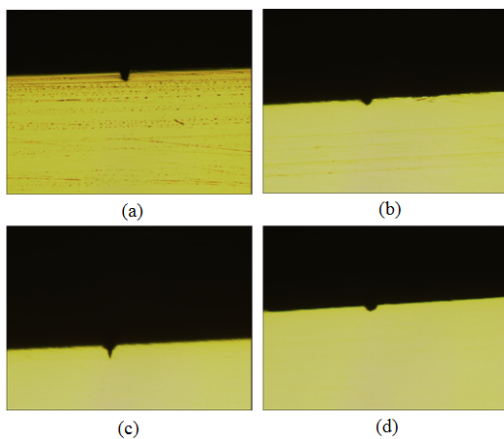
Section of grooves laser-engraved on SUS304 surfaces (see Table 2. for processing parameters).
